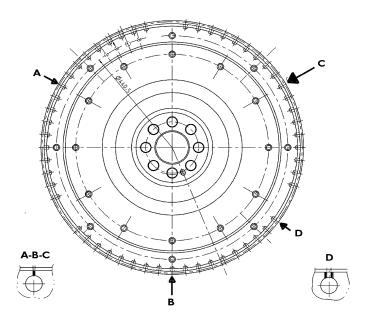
### DETAIL OF PUNCH MARKS ON ENGINE FLYWHEEL FOR PISTON POSITIONS
